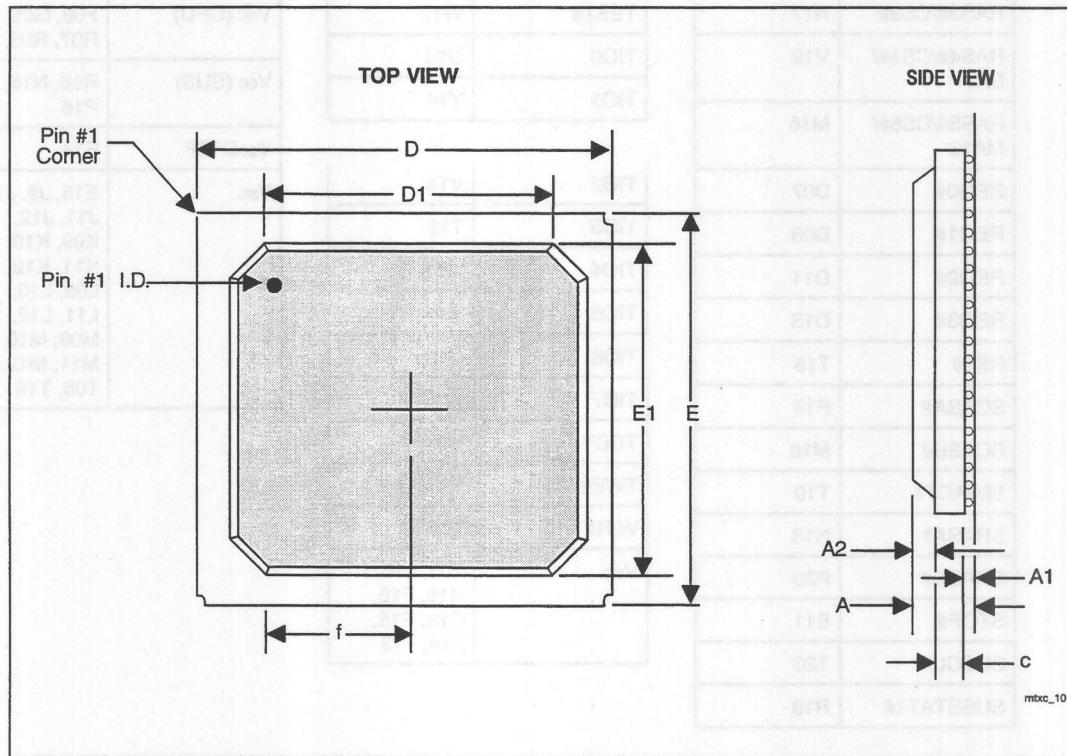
MTXC 324-pin Ball Grid Array (BGA)
